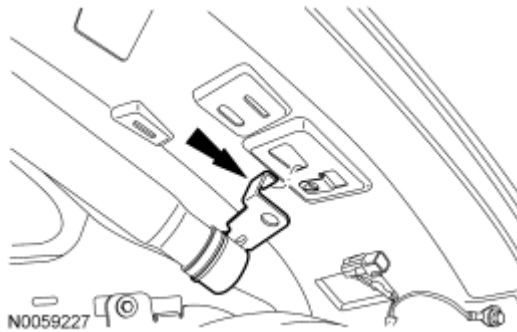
Moving Safety Canopy Module Forward To Release Rear Bracket Hook From Sheet Metal
